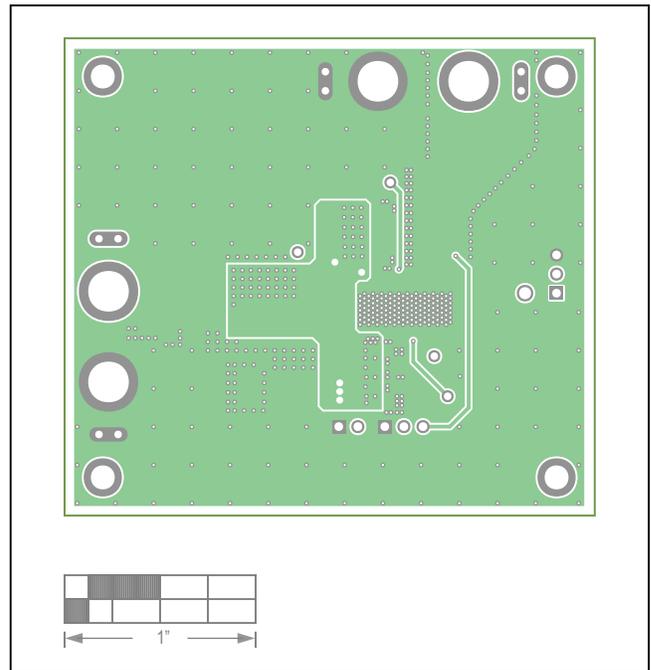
MAXM17536 5V Output EV Kit PCB Layout—Layer 3
